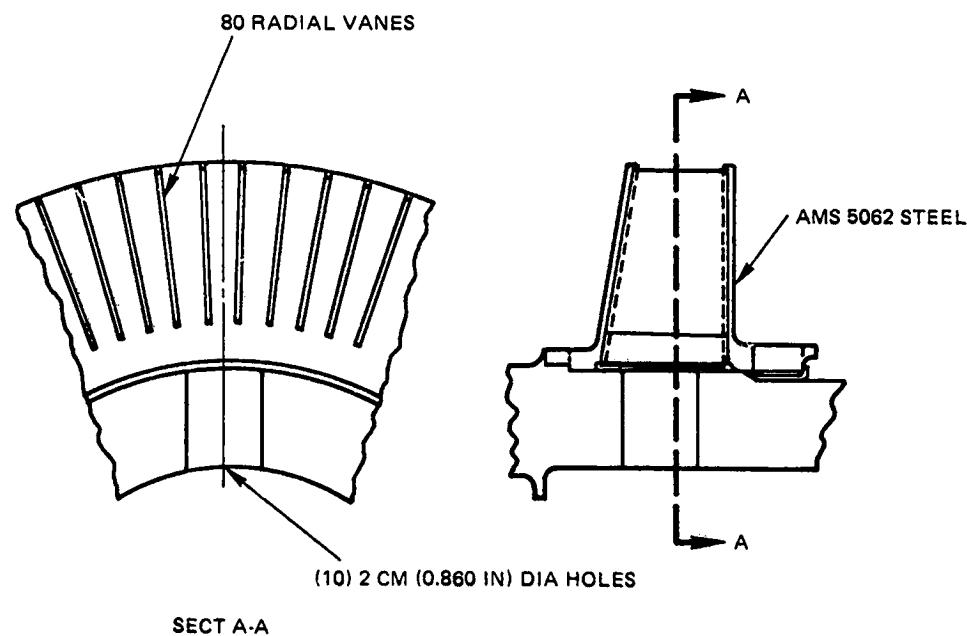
Shrouded Fan Deoiler Assembly
